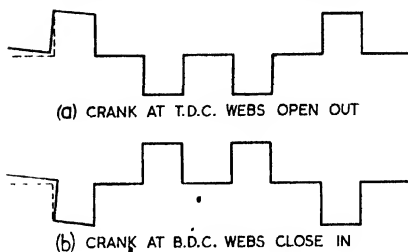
CRANKSHAFT WITH EXAGGERATED ALIGNMENT FAULT
